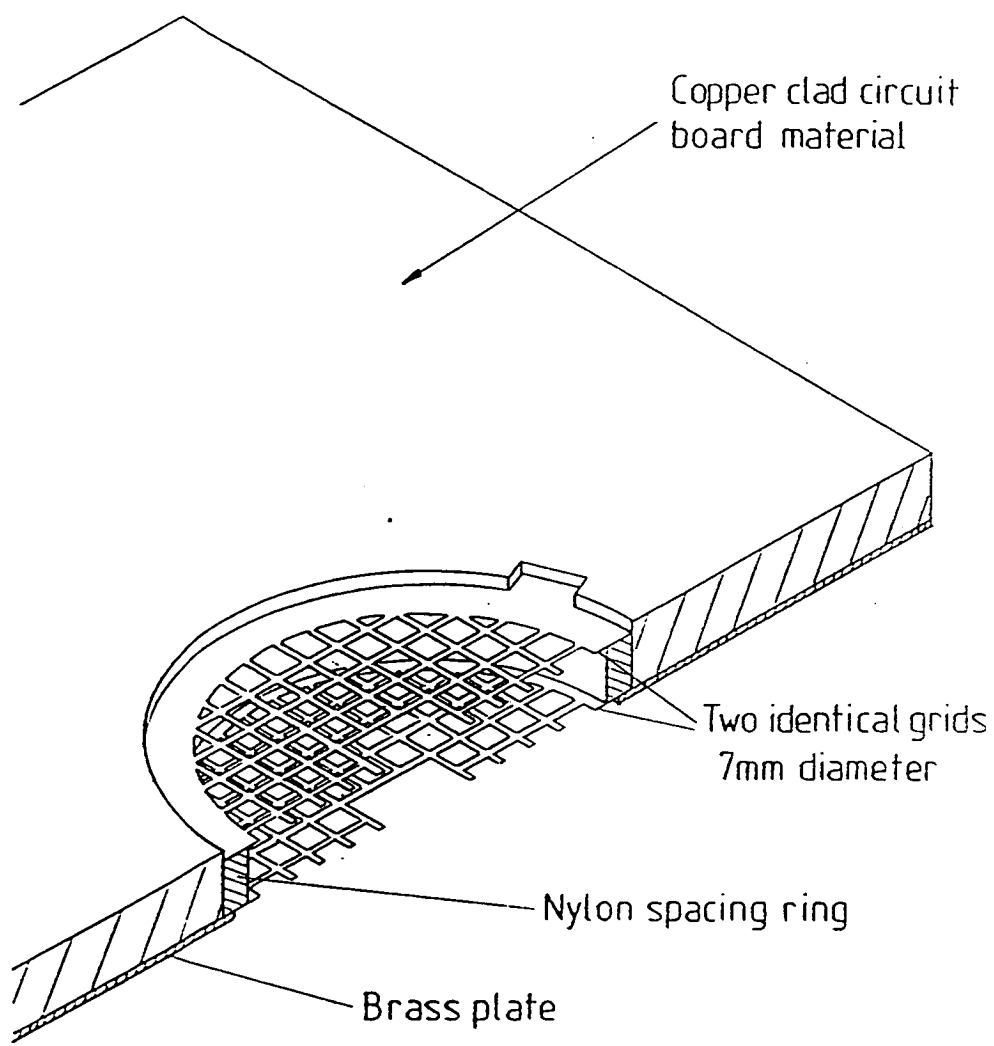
Sectional diagram of the prototype flat grid analyser based on printed circuit board construction techniques.
